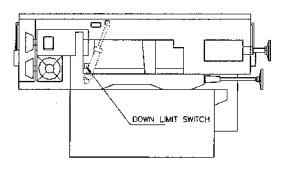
BACK VIEW OF ELECTRIC COMPONENT LAYOUT
